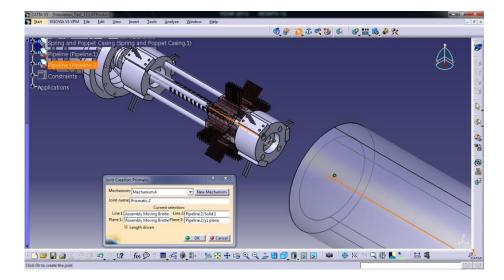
Example Prismatic joint for mechanism 4 (Moving Bristle with Pipeline).
